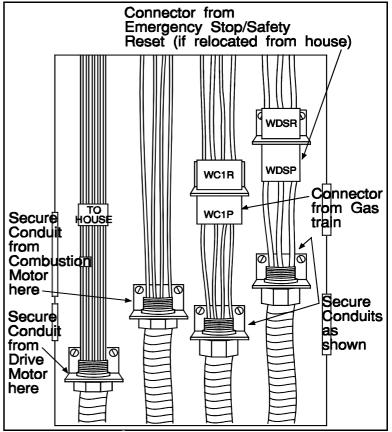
(MSIN0108AE) Installing Gas Dryer Conduits and Connectors
